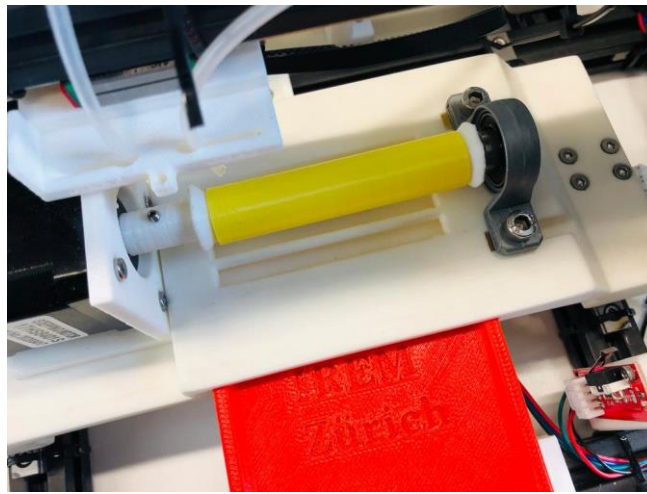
Plate rail, where graft, bearing and a motor are placed on it
